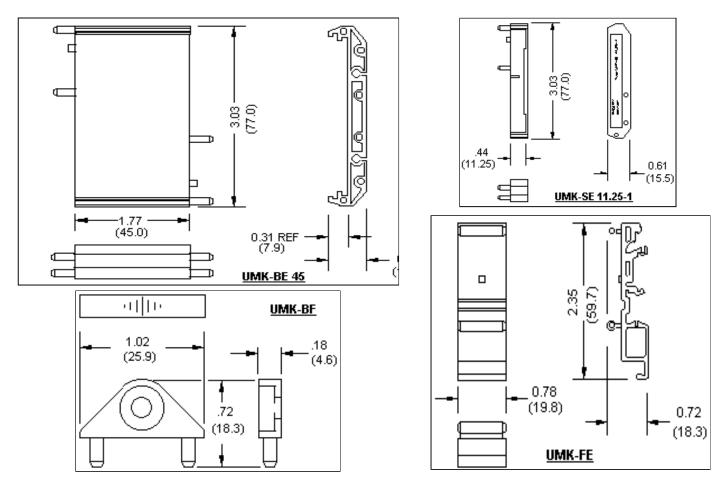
Digital Servo Axis Terminal Board Assembly Drawings
